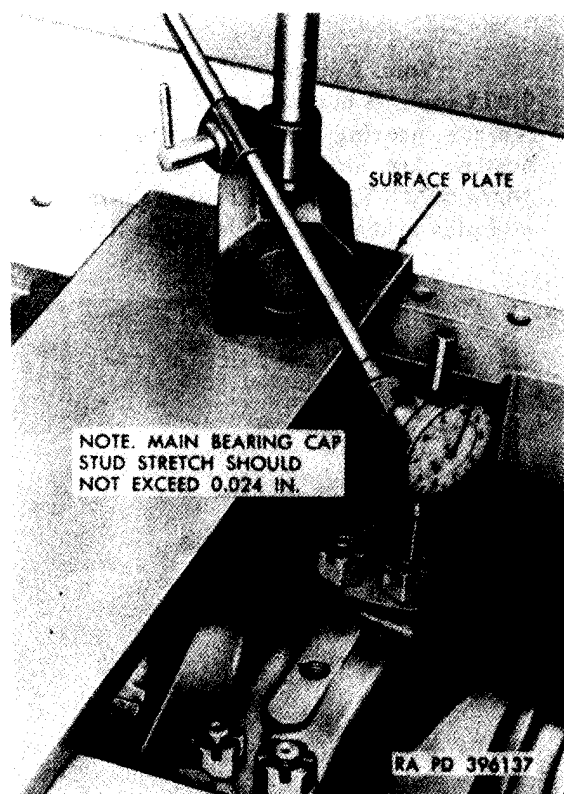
Measuring main bearing stud stretch using dial indicator.
